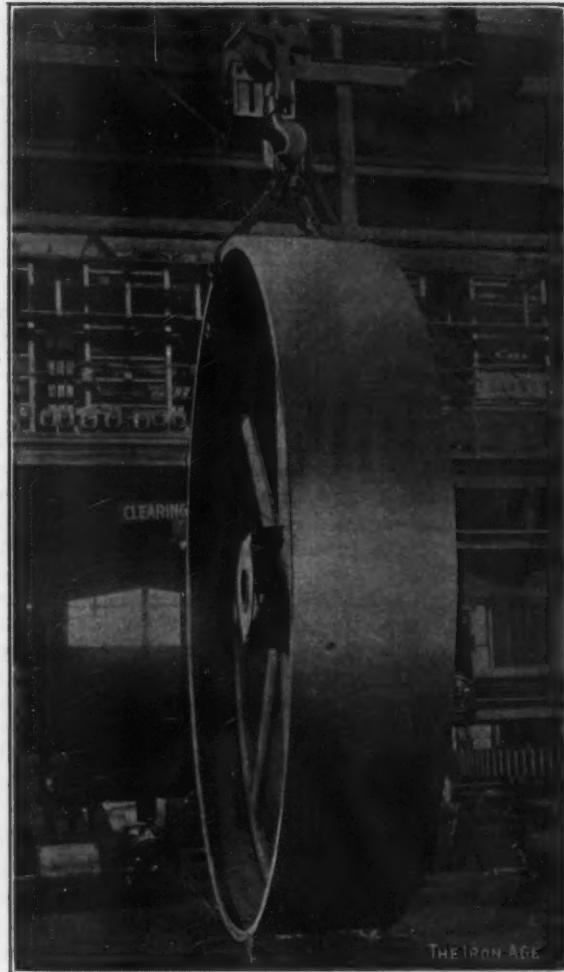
The Finished Wheel with the New and Old Halves United.
